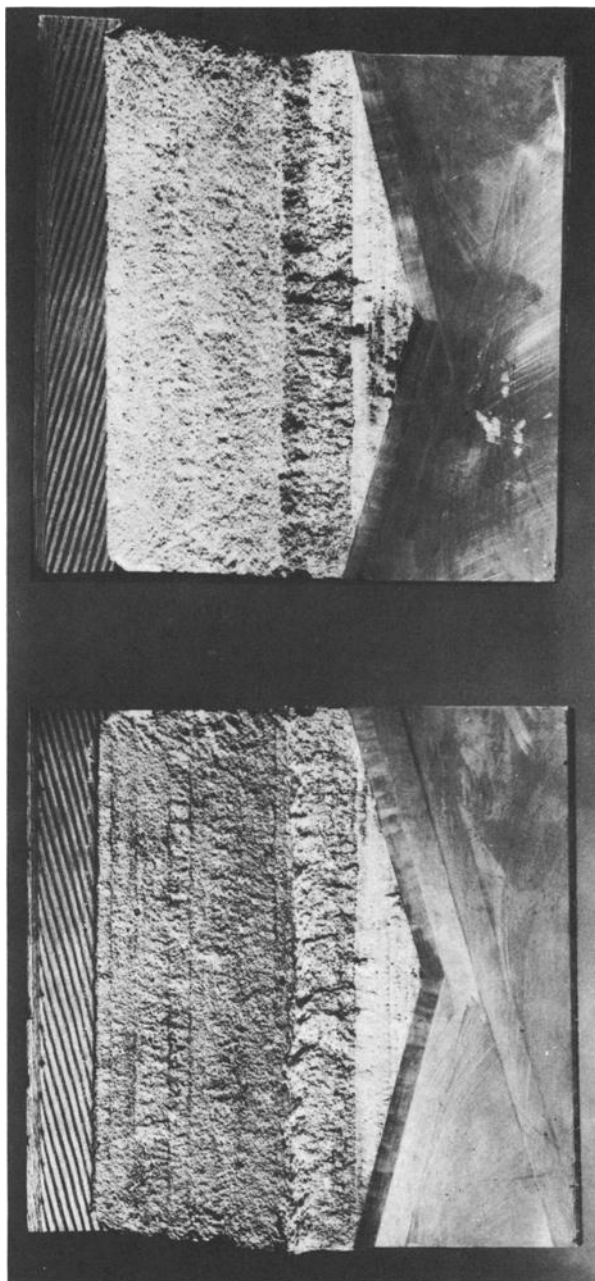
Fracture surfaces of 7.7-in. notch bend fracture toughness specimens (FNT-orientation) from groove welded 7.7-in.-thick 5083.0 plate welded with 5183 IG electrode with the gas consumable electrode method testing at room temperature (S-410801) (about $\times 0.6$).
